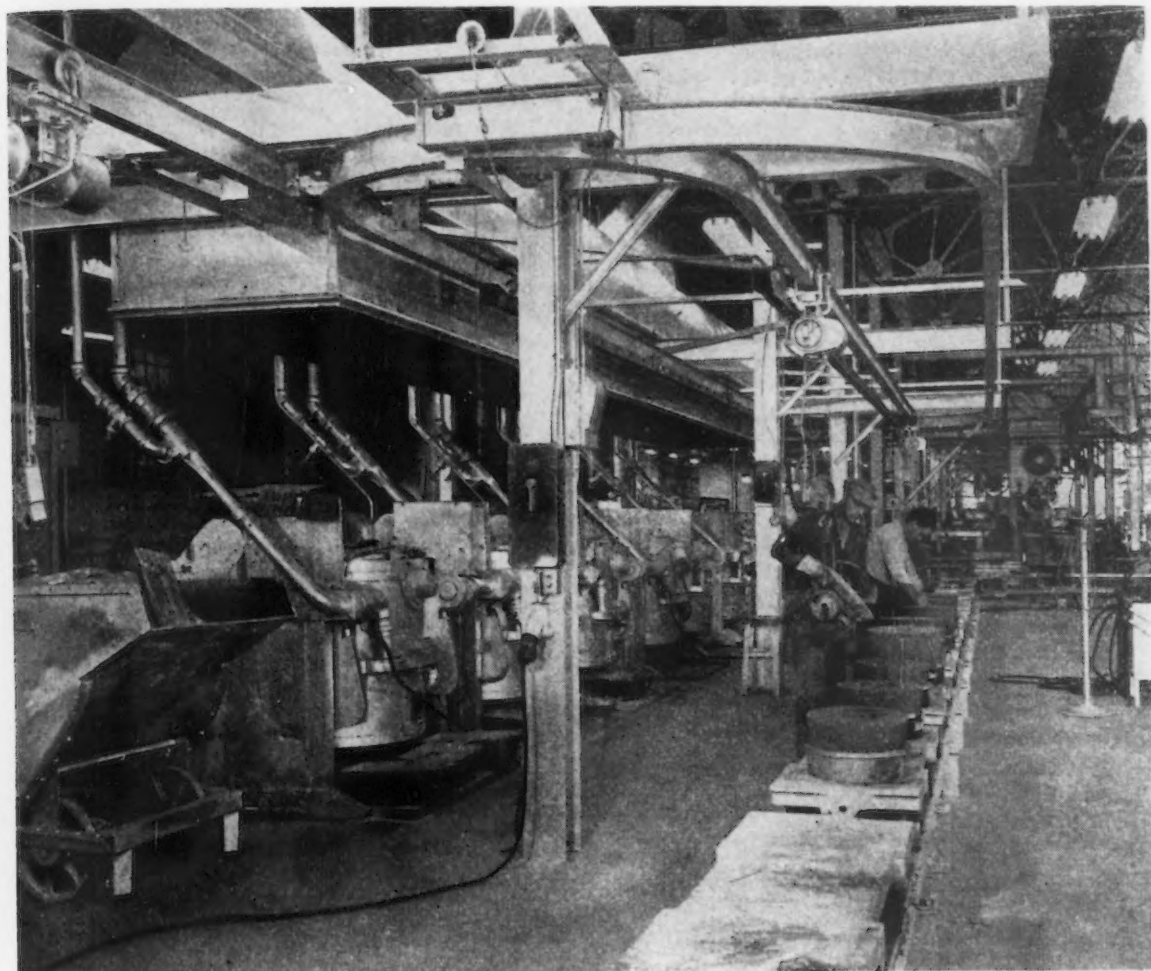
Mold conveyers passing the pouring station. Furnaces are to the left. Molds visible in the foreground have plaster drags and dry sand copes.
